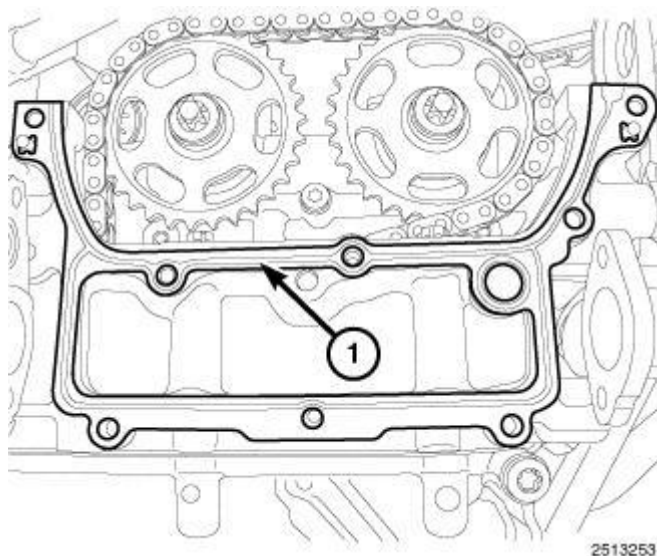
Timing Chain Cover At Engine Bolts
